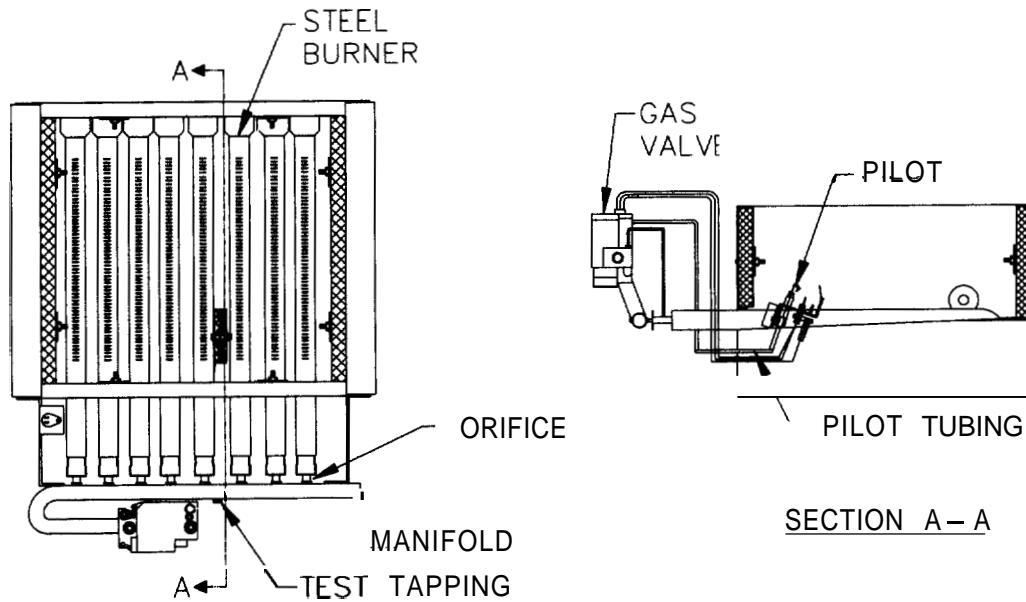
Gas Valve, Manifold and Burner Assembly - Intermittent Ignition
